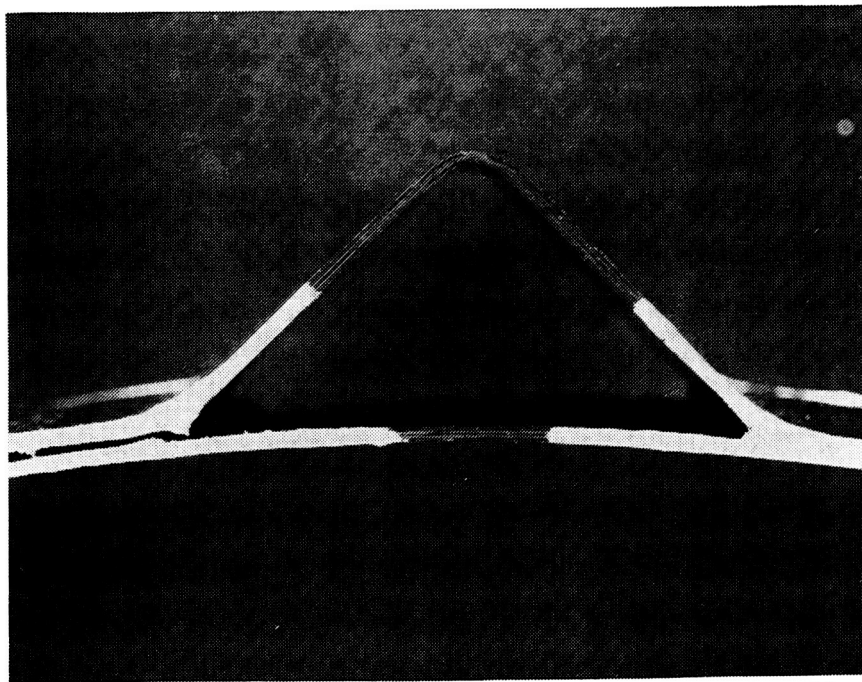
Typical 45°-Y Failure for Elevated Temperature Testing
